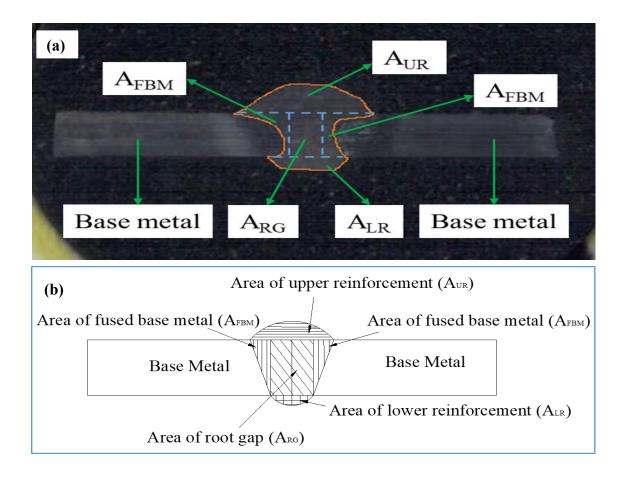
Transverse section of the welded plate (a) actual weld bead, and (b) schematic diagram.
